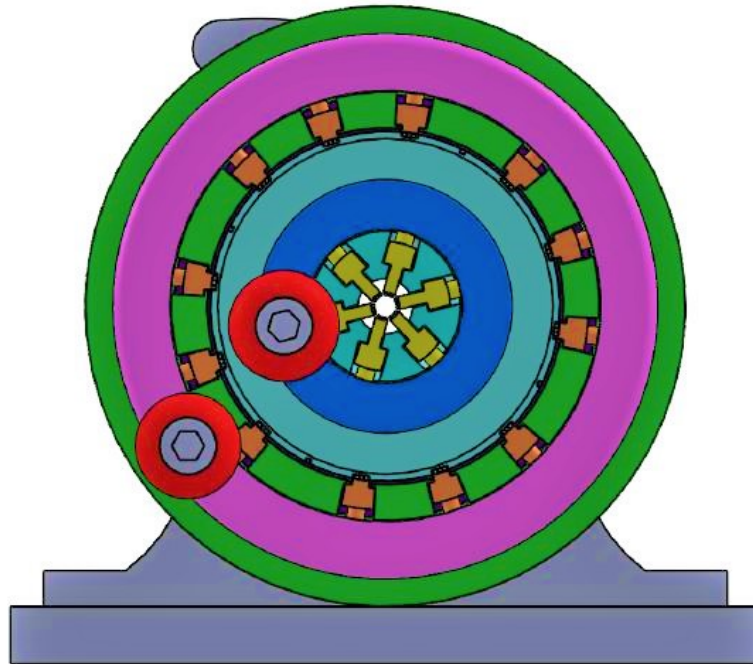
Front view of the actuation design. The grey components the holder in which the actuation design is placed. The following components are shown: outer cam (pink), slider house (green), inner cone (light blue), inner cam (light blue), inner sliders (yellow), slings (red).
